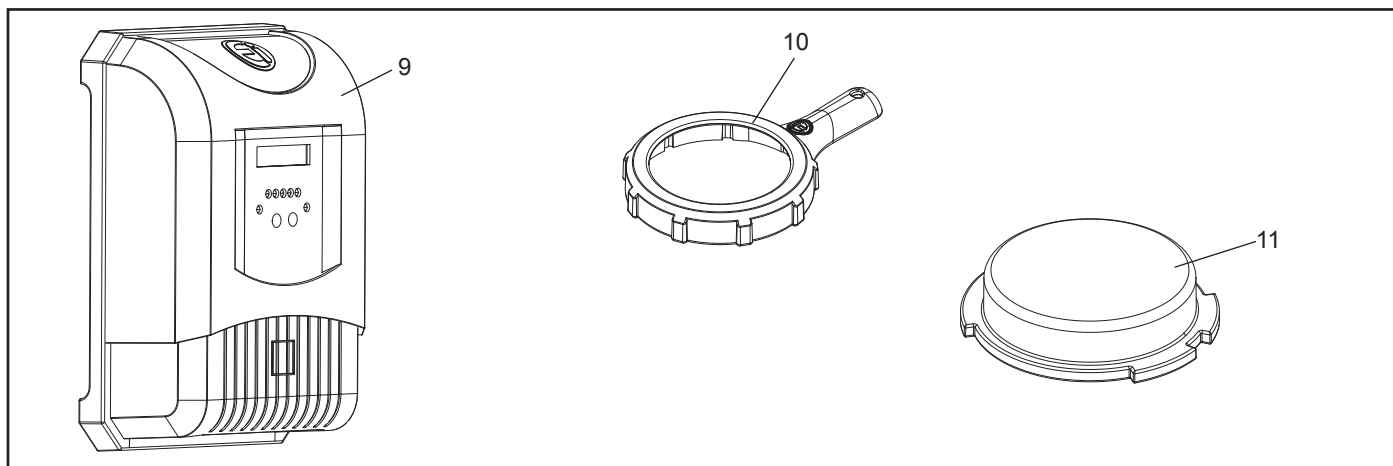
Power Pack, Locking Ring Tool, and Winterizing Cap
